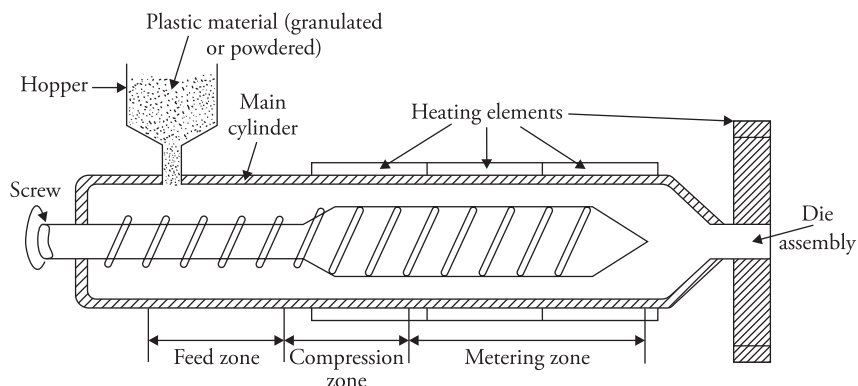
Schematic diagram of extrusion moulding machine
